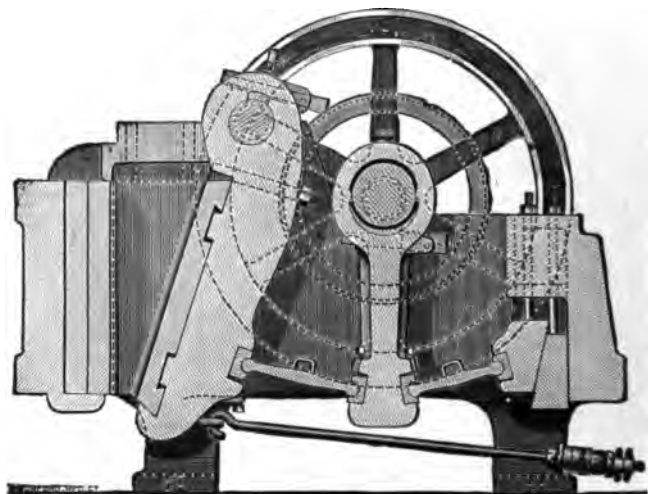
THE FARREL CRUSHER. SECTIONAL VIEW.
